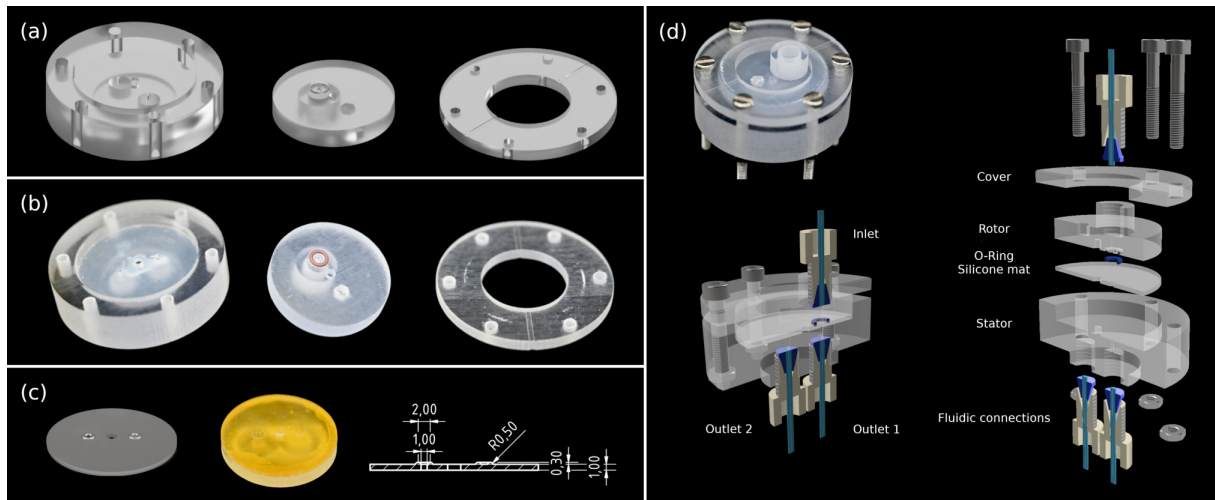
Design and implementation of the test valve: (a) CAD drawing of stator, rotor, and cover; (b) 3D printed rotor, stator, and cover: sealing area of the rotor is covered with a silicone mat, and an O-ring is placed in respective groove in rotor. Parts were printed with polyjetting; (c) from left to right: CAD drawing of a 3D printed sealing mat with integrated O-ring-like structures, 3D printed sealing mat, technical drawing of the sealing mat; (d) top-left: assembled 3D printed test valve; bottom-left and -right: section and exploded view of a CAD drawing of sealing concept 5 showing placement of respective sealing elements.
